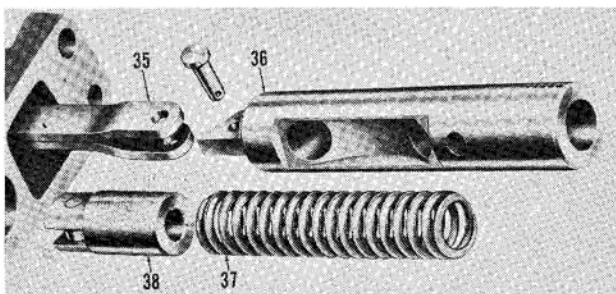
Control valve spool (36) can be removed from link (35) after removing lever support as shown in Fig. 181. Lever return spring (37) and follower (38) fit in bore in support.
